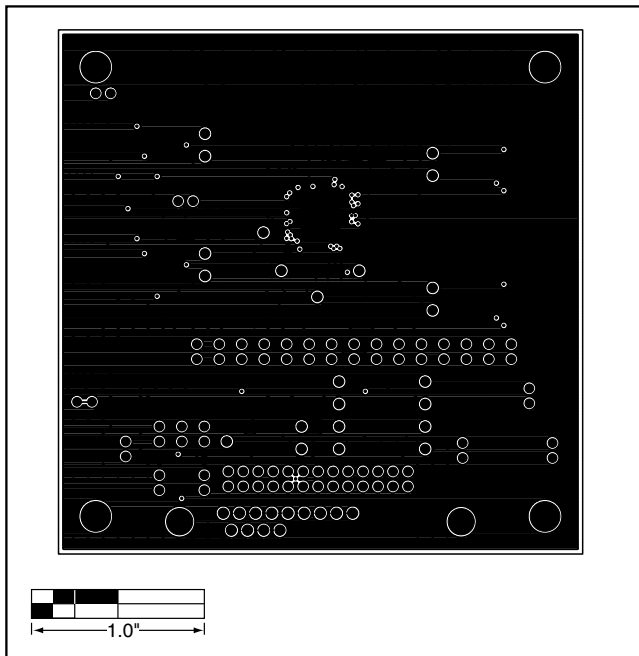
MAX2828/MAX2829 EV Kit PC Board Layout—Inner Layer 2
